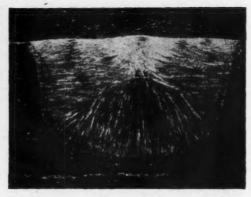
Photomicrograph of a cross-section through a weld between two sheets of stainless steel, one annealed and the other extra-hard
